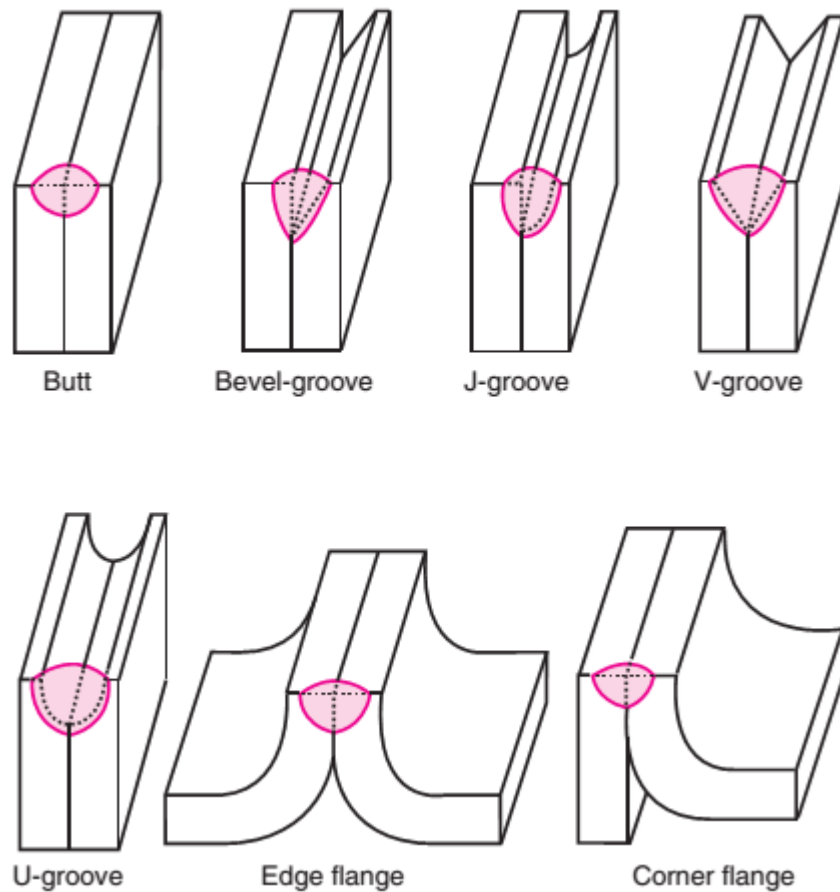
Types of weld that may be made with basic edge joint
